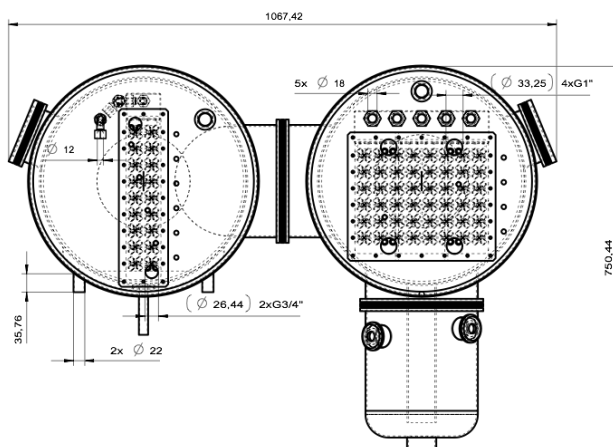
CAD drawing of the heat and mass exchanger, measurements in mm. On the left is the AD unit and on the right the EC unit.
